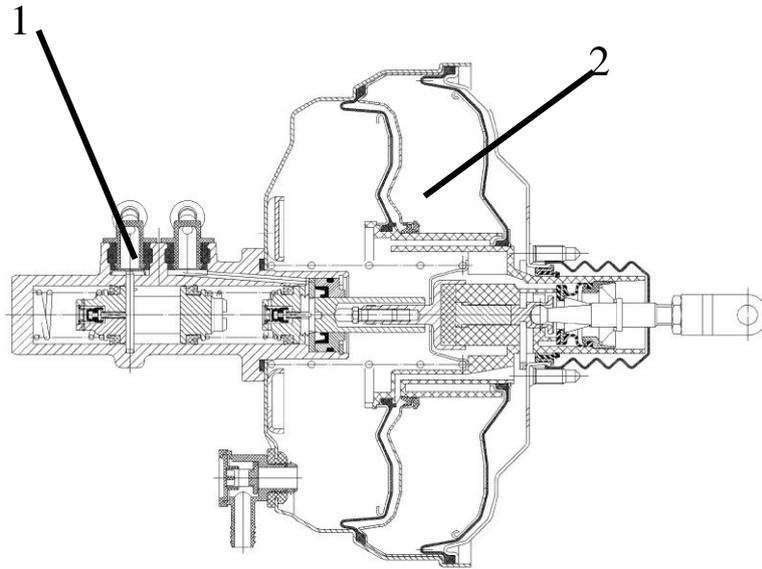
Vacuum Booster with Brake Master Cylinder Assembly
